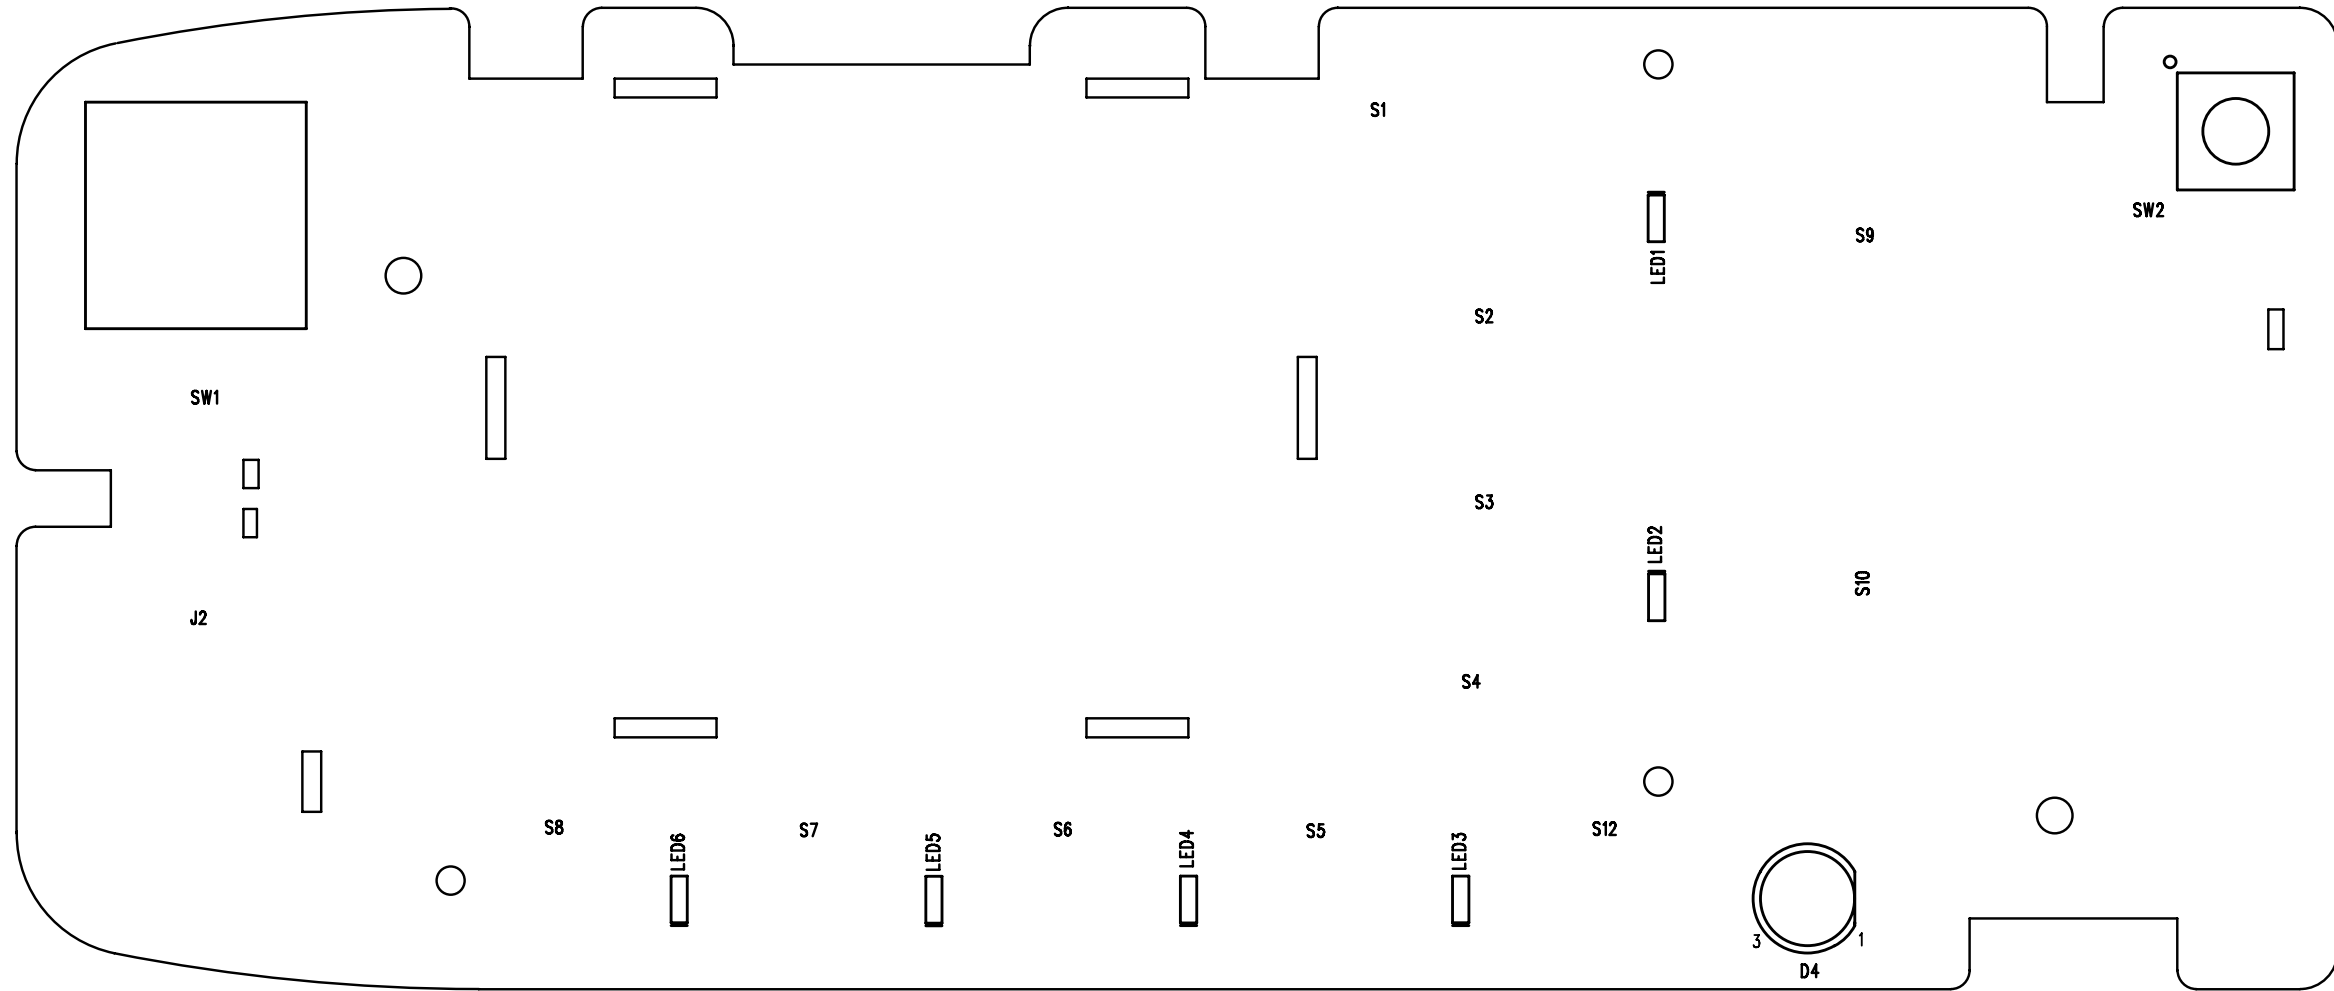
TM840 400-470MHz Keypad Board Top Side PCB View
